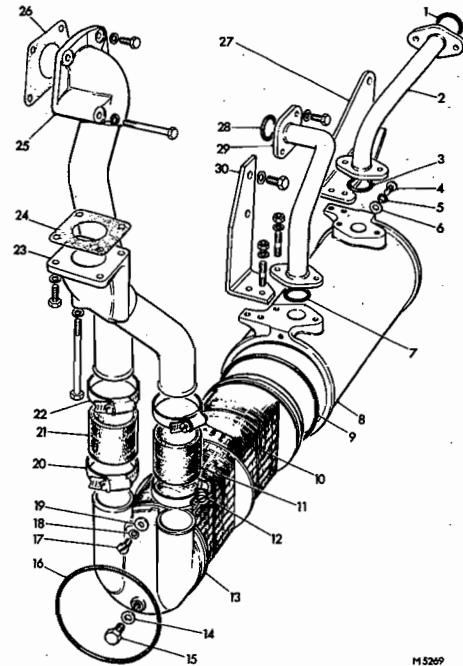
EXPLODED VIEW OF HEAT EXCHANGER
